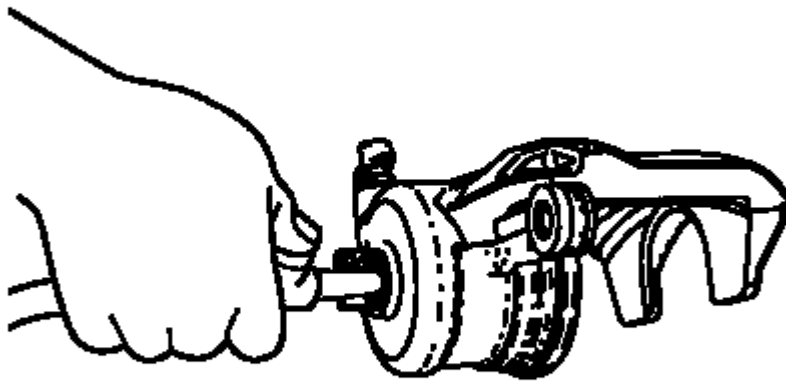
Brake Caliper With Heavy Mechanic's Wire
